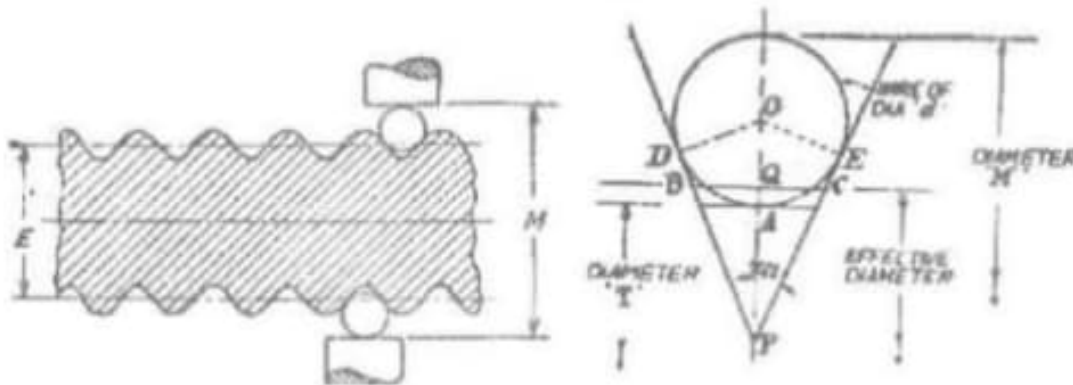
Effective Diameter of Screw Thread Measurement by 2 Wire Method
